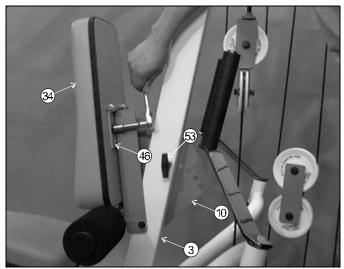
Next, attach the Back Pad (#34) to the Metal Hinges (#46), as shown above, and secure them into place (at the top hole of the Metal Hinge) using two Hex Head Cap Screws 3/8-16 X 1 1/4 (#94) and two Flat Washers SAE 3/8" (#71). Refer to Fig. 68 on page 27 for illustration of this assembly.
